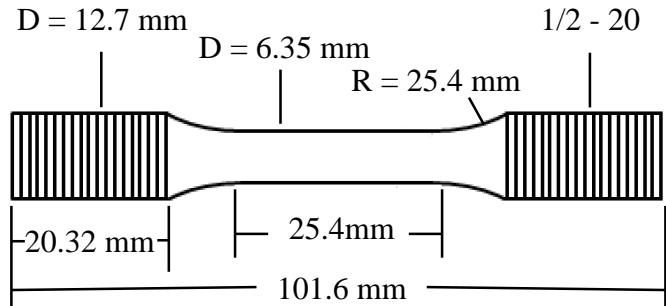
Specimen dimensions in mm tolerances of 0.0254 mm.
